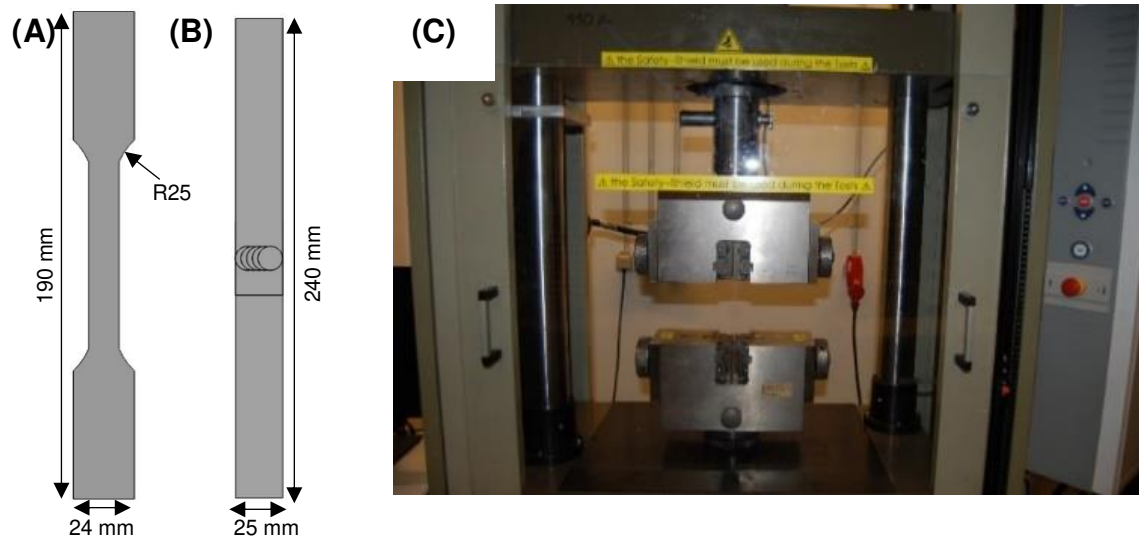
(A) Tensile test sample, (B) lap shear sample, and (C) tensile test machine.
